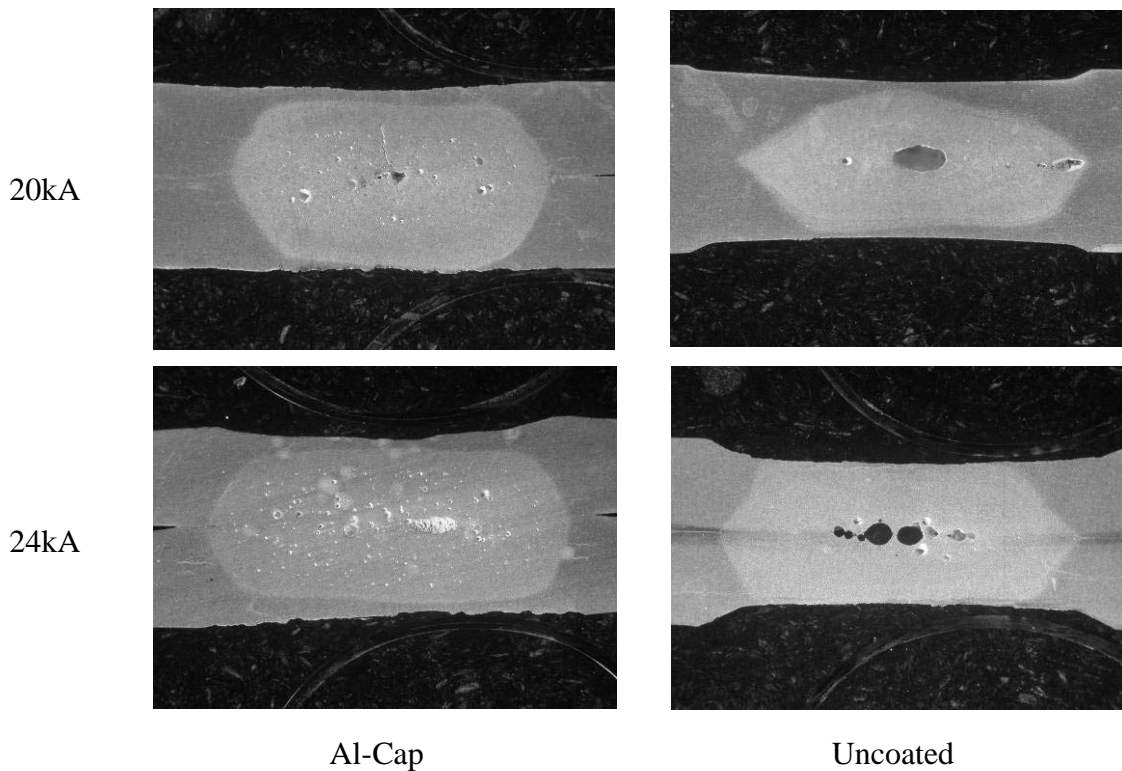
Cross sectioned aluminum welds at 20kA and 24kA of the Current Test
